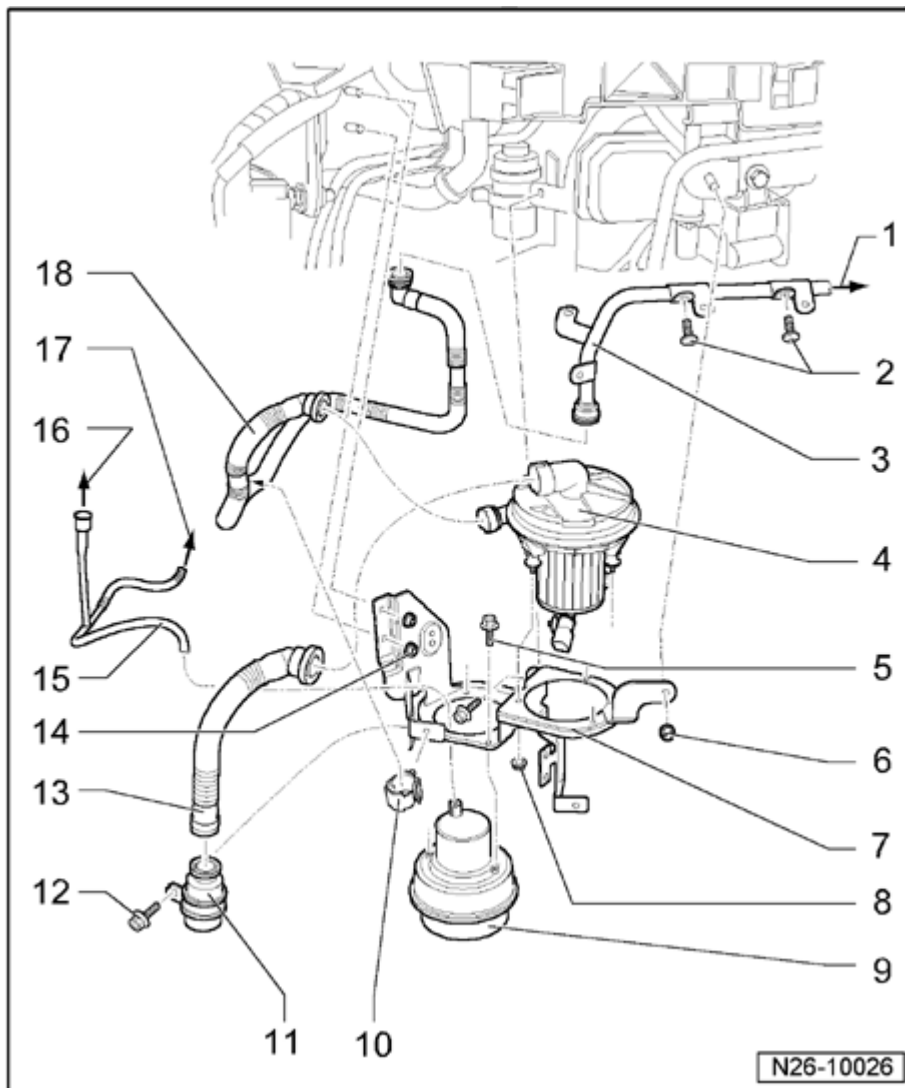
Secondary Air Injection System Components, Vehicle Side, Assembly Overview
